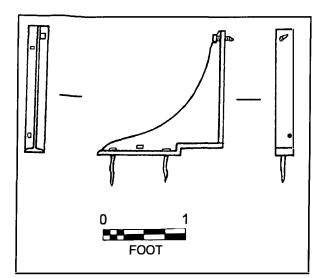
Side and end views of boiler saddle. Drawing by Jim Bradford.
